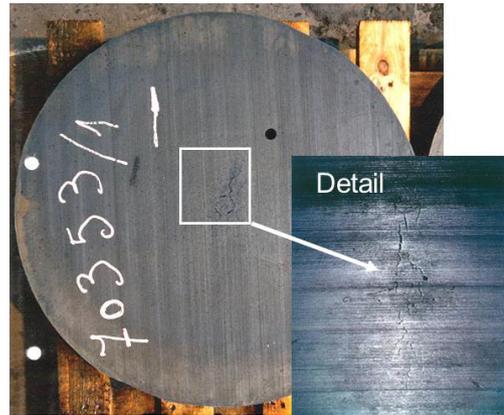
Crack appearance at too high pinching loads at a 2 roller drive unit.
